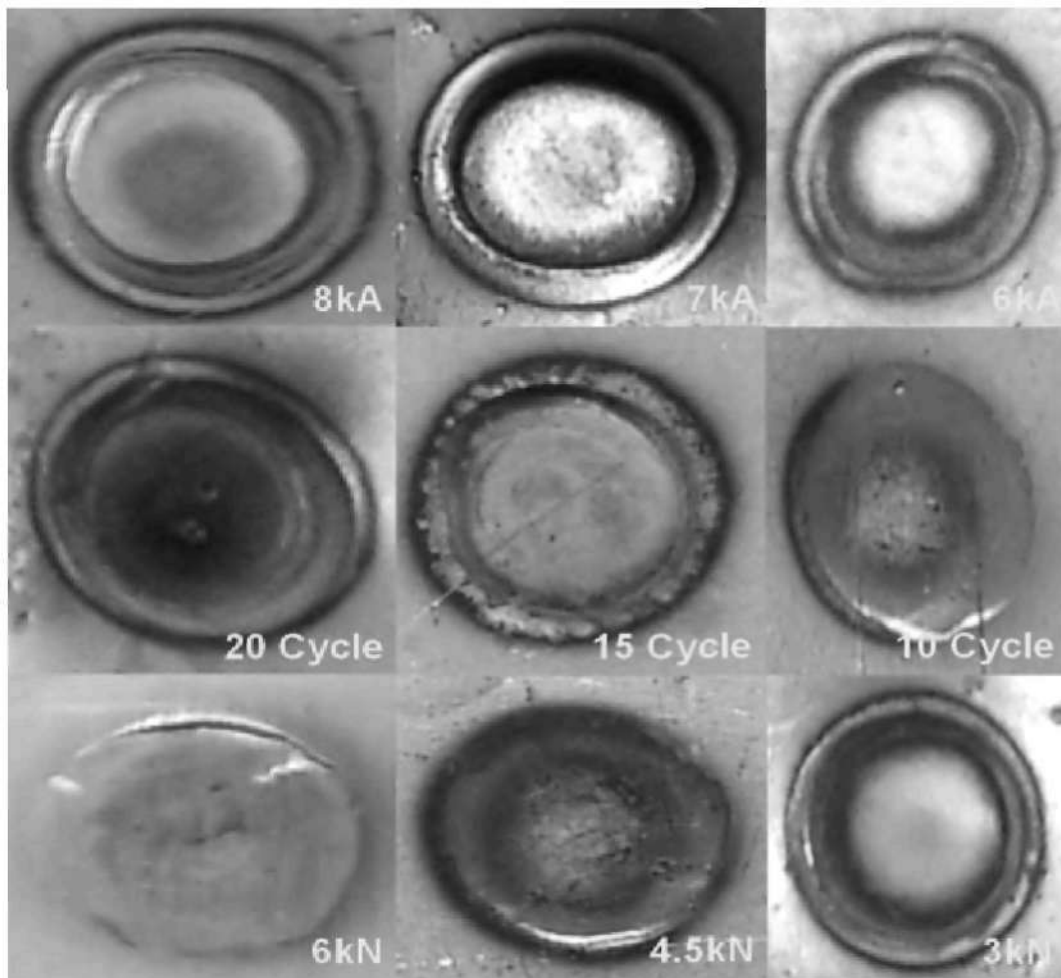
Macrograph of weld Indentation that has color circles
